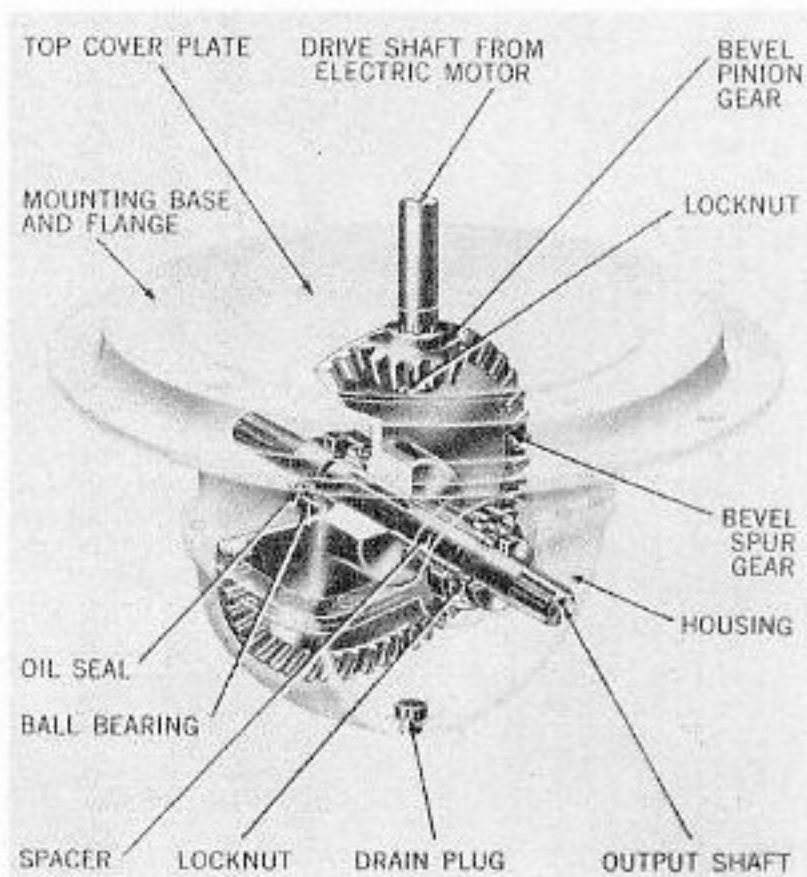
Motor Base Bearing Bracket, Sectional View
